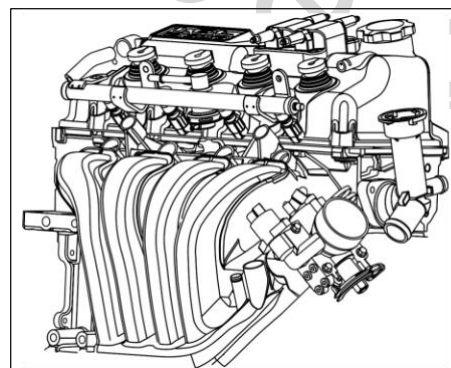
Removal of Tritec 1.6L Engine Throttle Body
